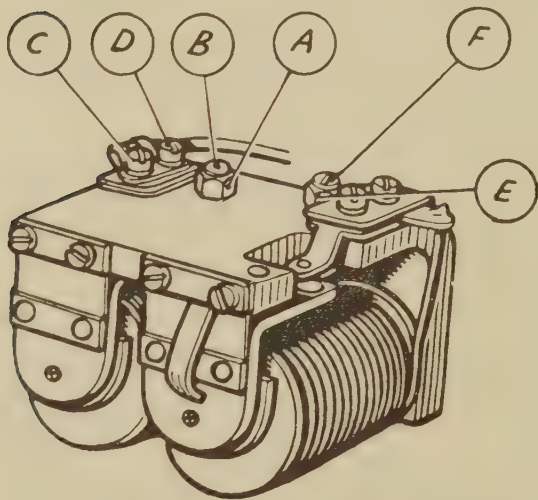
The Cut-out and Regulator Assembly (Morris).
